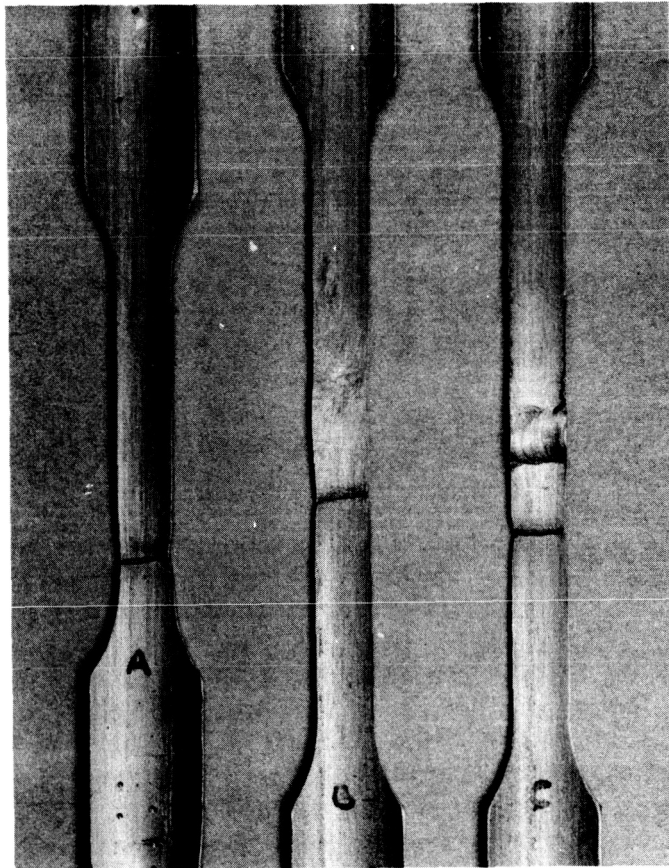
Longitudinal Weld Tensile Specimens
